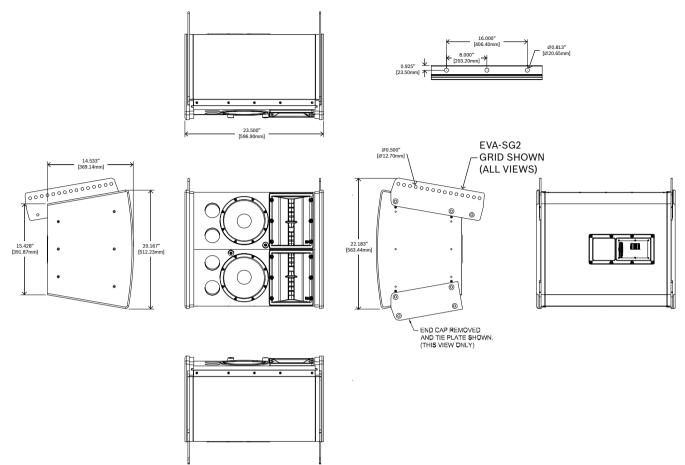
EVA-2082S/920 or EVA-2082S/1220 dimensional views and spreader bar attach holes
